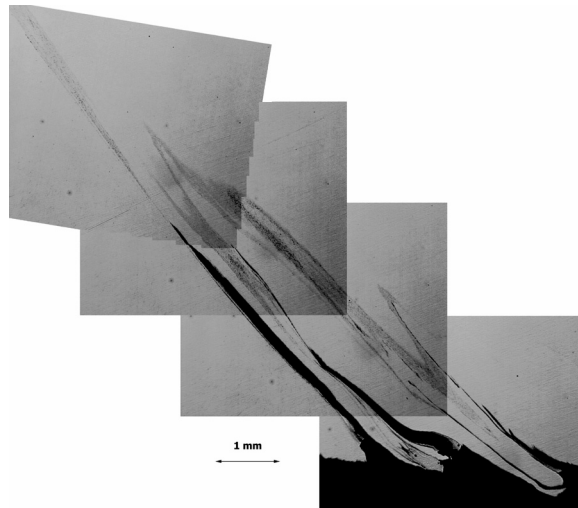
Higher magnification example of the weld defect in FSW #2.
